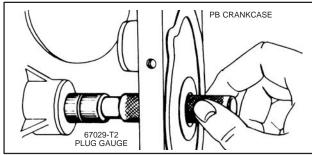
GAUGING MODELS D, P, PB CAM BEARING
